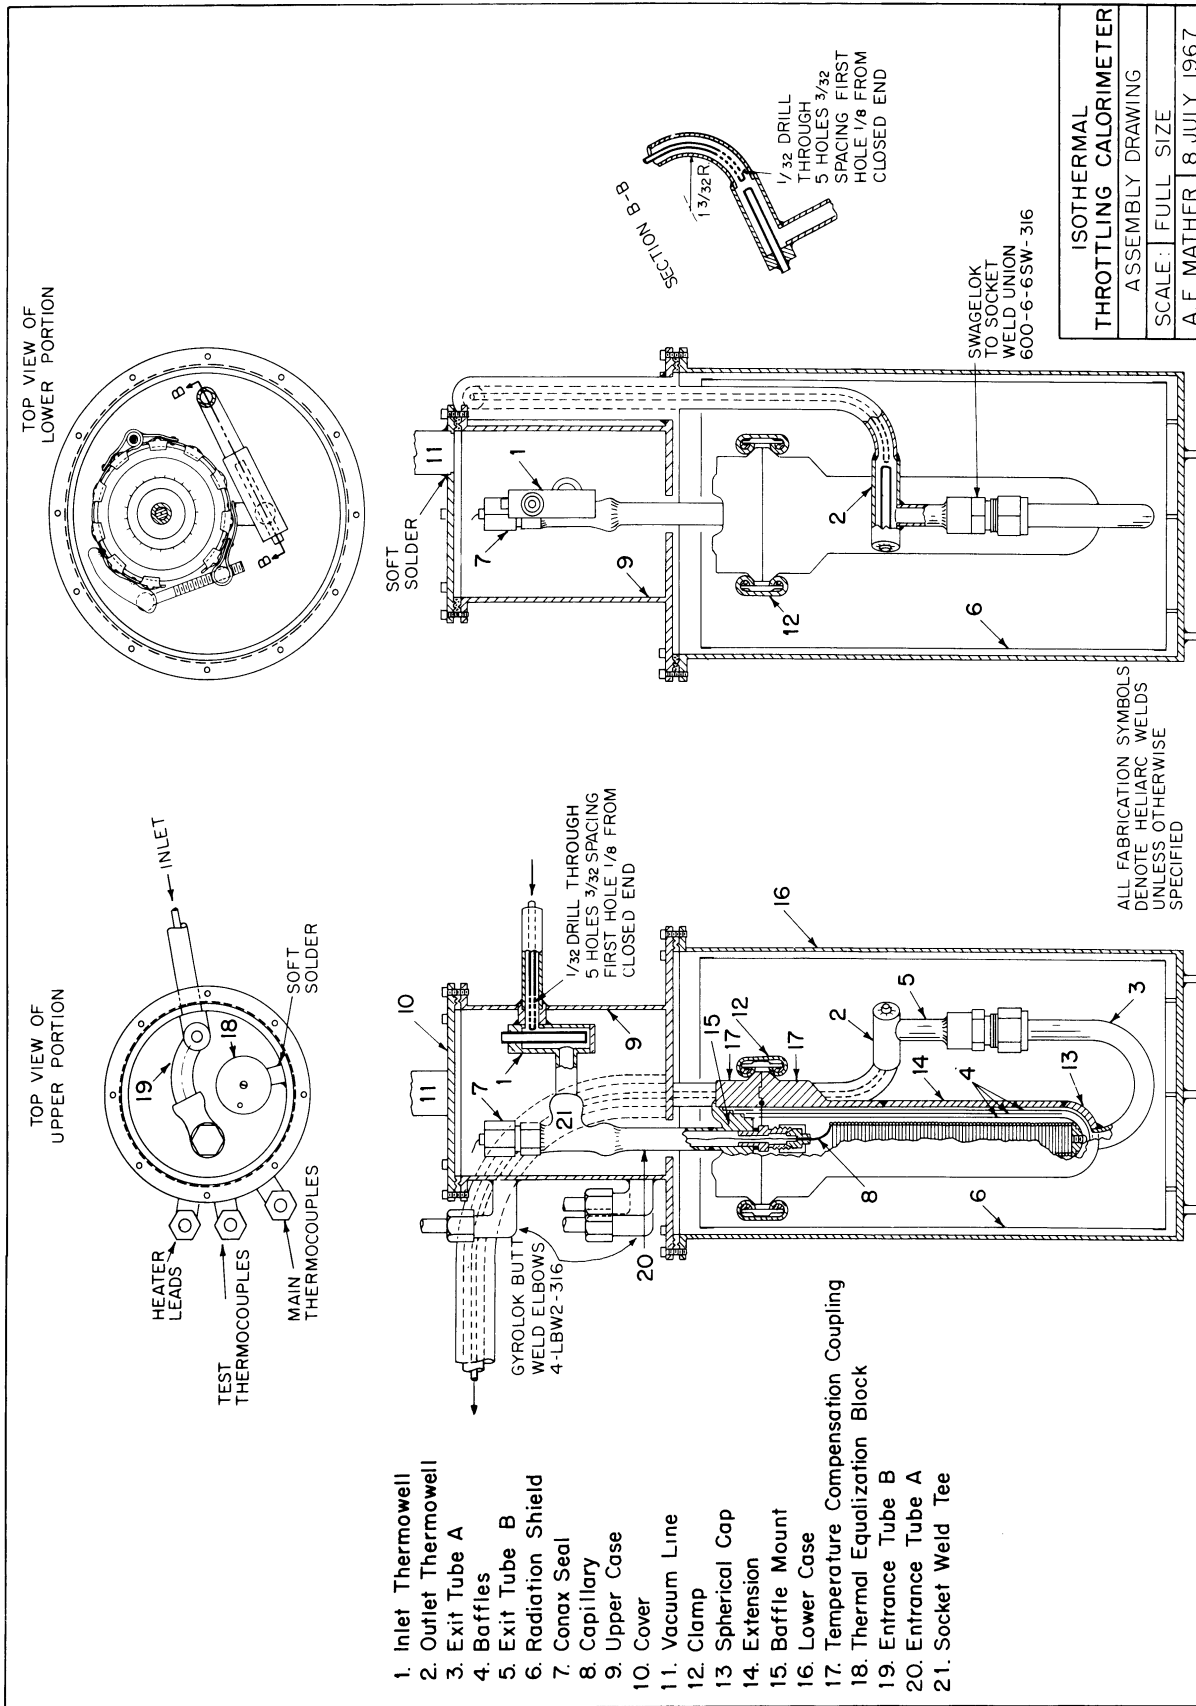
Assembly Drawing for Isothermal Throttling Calorimeter
